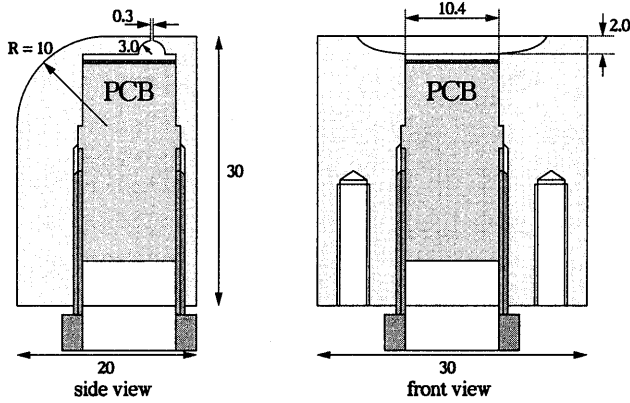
Mounting of the PCB pressure transducer inside on of the blocks that form the constriction.
